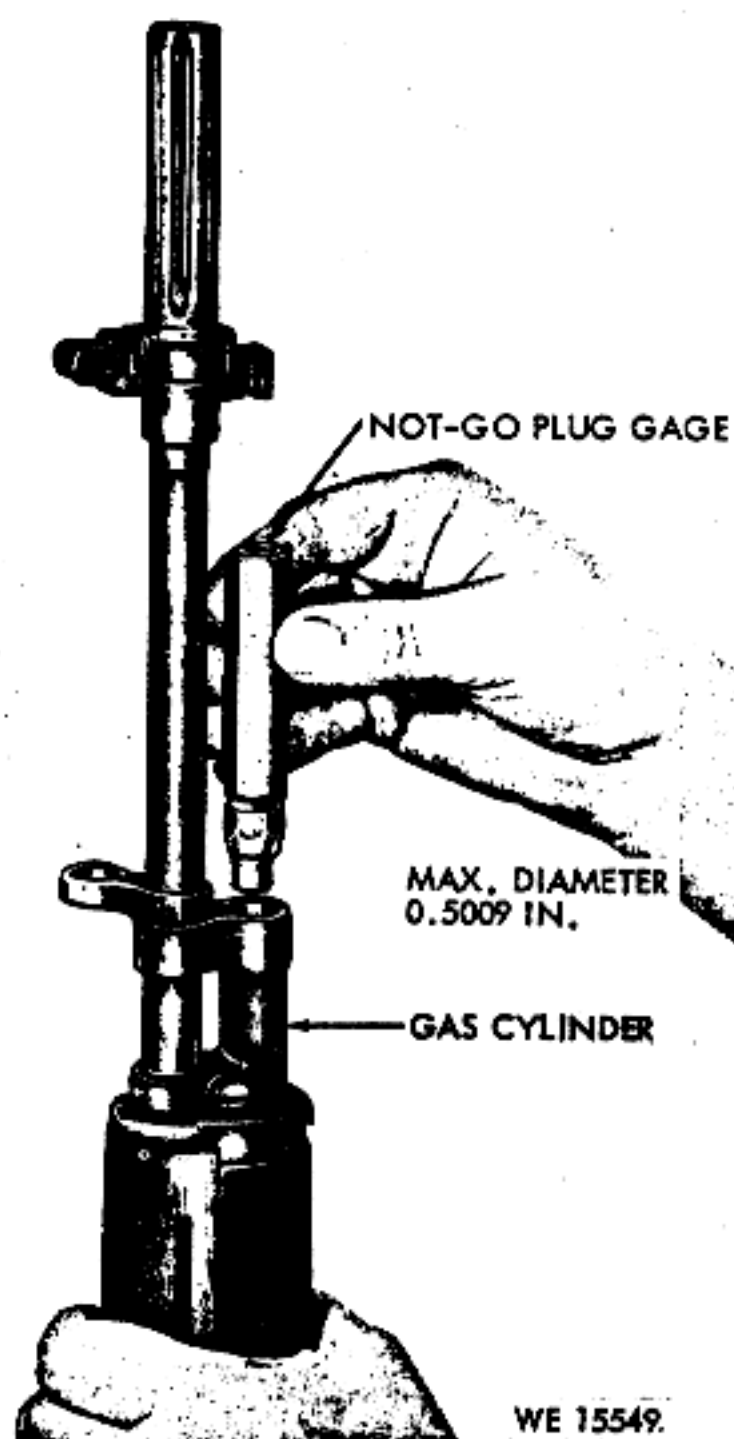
Checking diameter of piston hole in gas cylinder using piston not-go plug gage 7274755.
